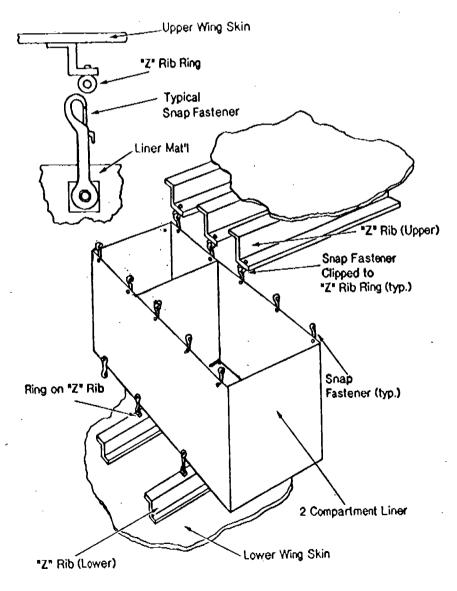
INBOARD WING TANK LINER INSTALLATION
